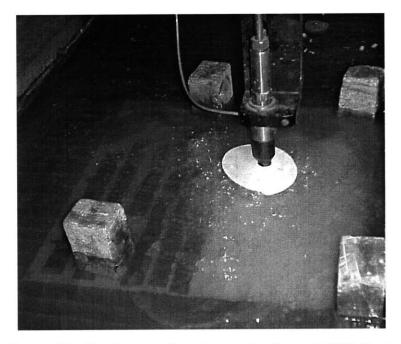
Abrasivejet nozzle cutting part in submersed 1/16" Aluminum sheet.
